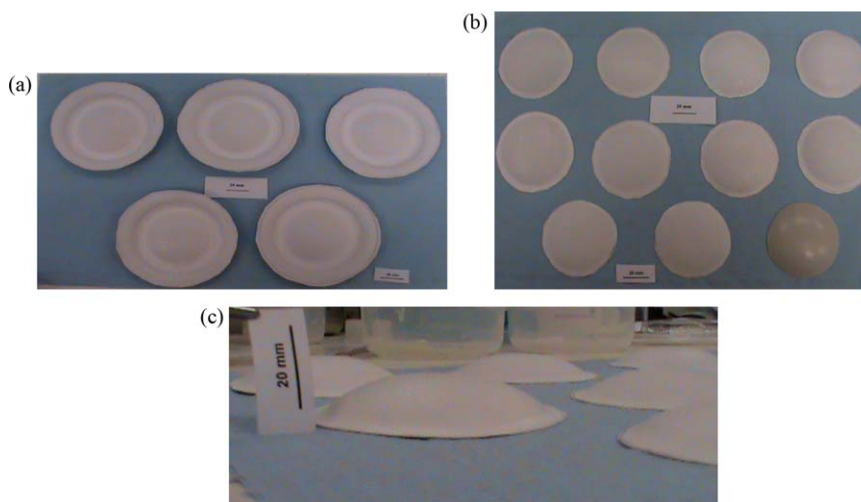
Vacuum forming and formed domes: (a) as-formed domes; (b and c) edge trimmed.
